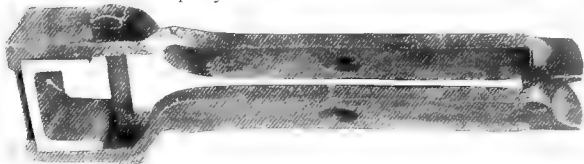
Channel Brake Beam Forged Steel Strut for Outside Application. Damascus Brake Beam Company
